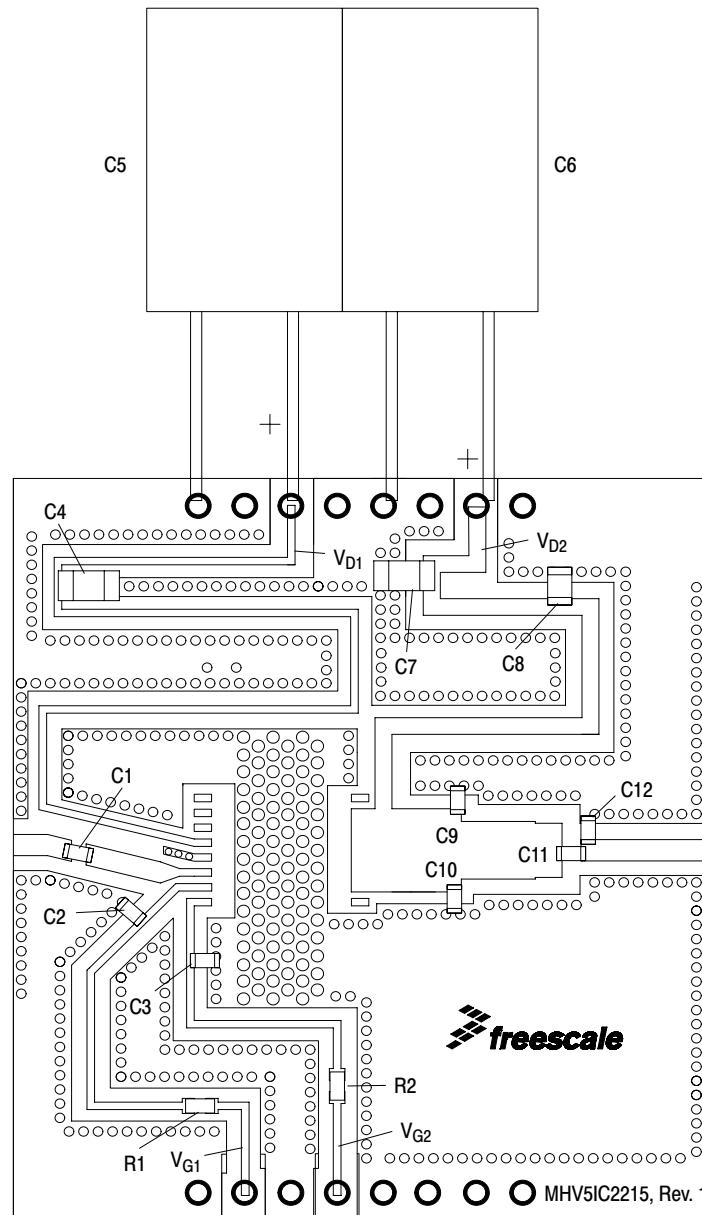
MHV5IC2215NR2 Test Circuit Component Layout
